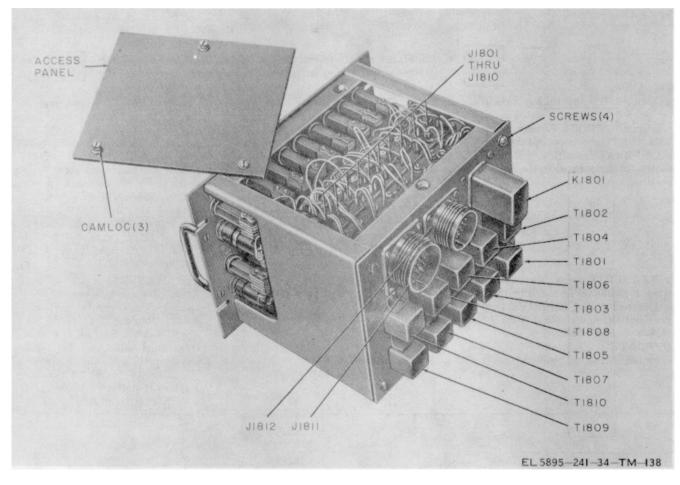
Control-Monitor C-3434/FSW-8, rear view, parts location.
